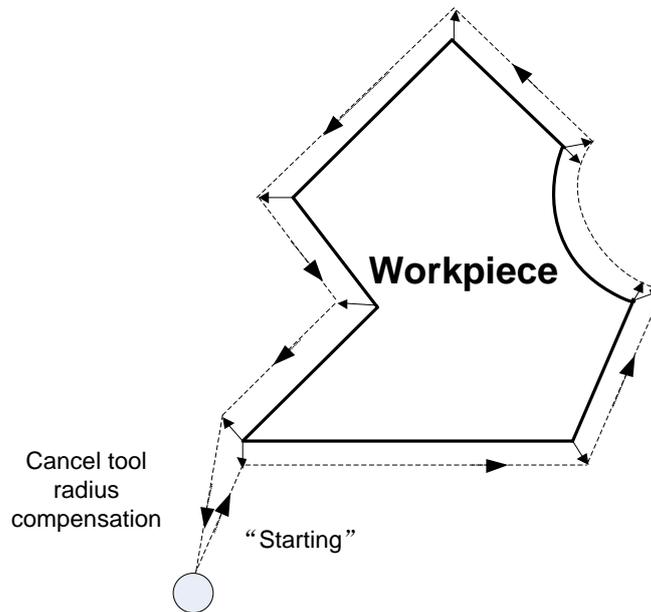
Schematic Diagram for Tool Radius Compensation
